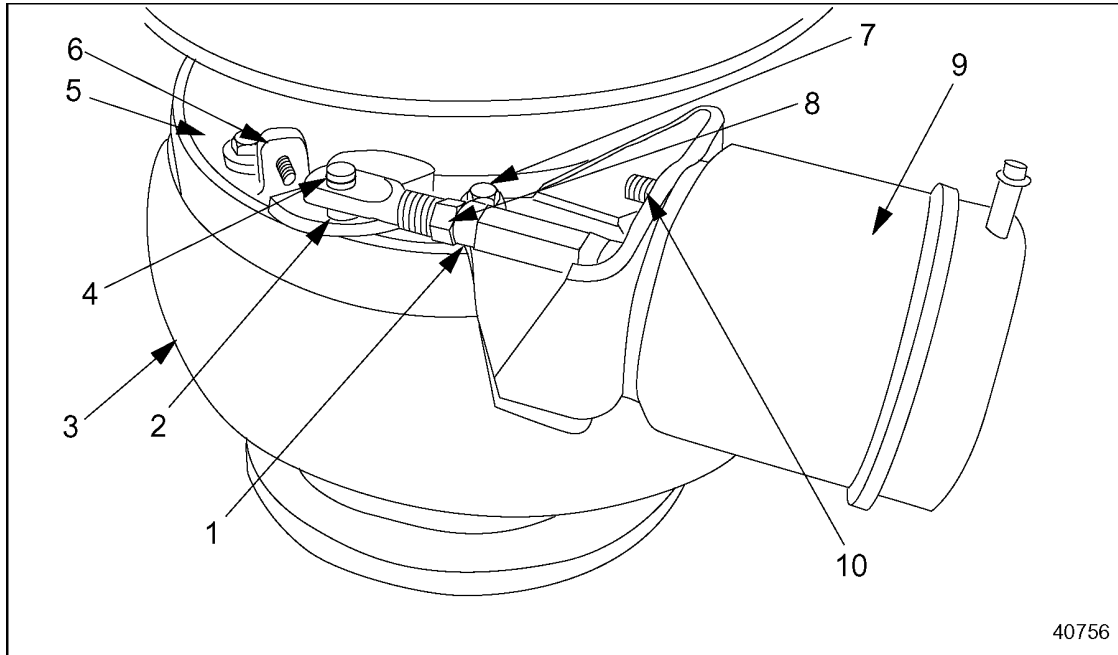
Measurement of the Rod End to Actuator Can Base
